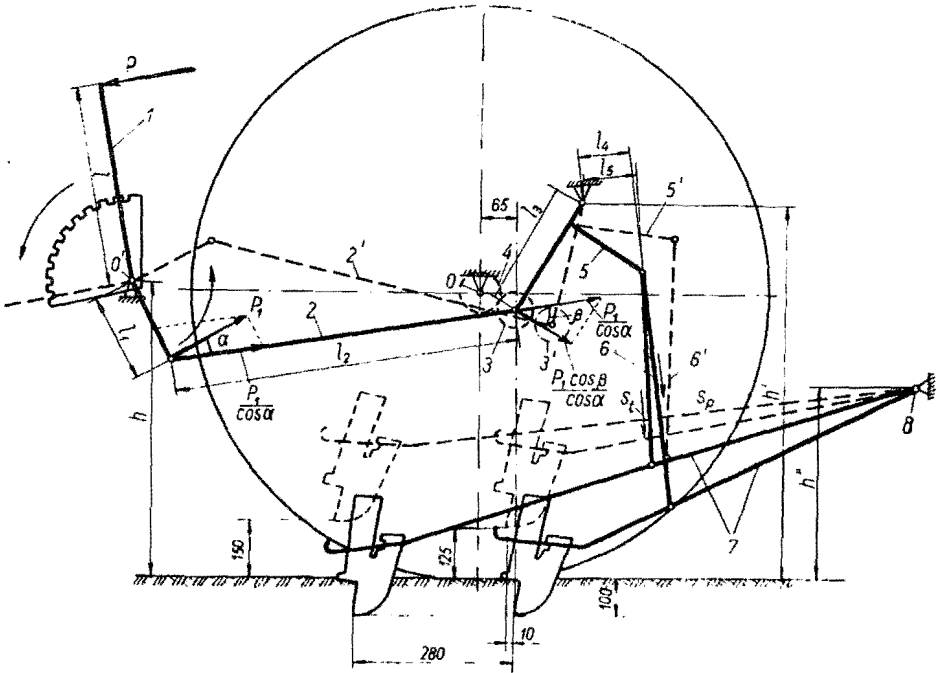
Example of a lever system for manual lifting of openers: 1 — hand lever; 2 — link; 3 — toothed wheel driving the drilling units; 4 — gear wheel mounted on the hub of ground wheel; 5 — lever arm; 6 — links for lifting the opener lever; 7 — opener levers; 8 — hinged connection of lever with the lever supporting beam. Note: working position of the openers is marked with continuous lines, transport position — with dashed lines.
